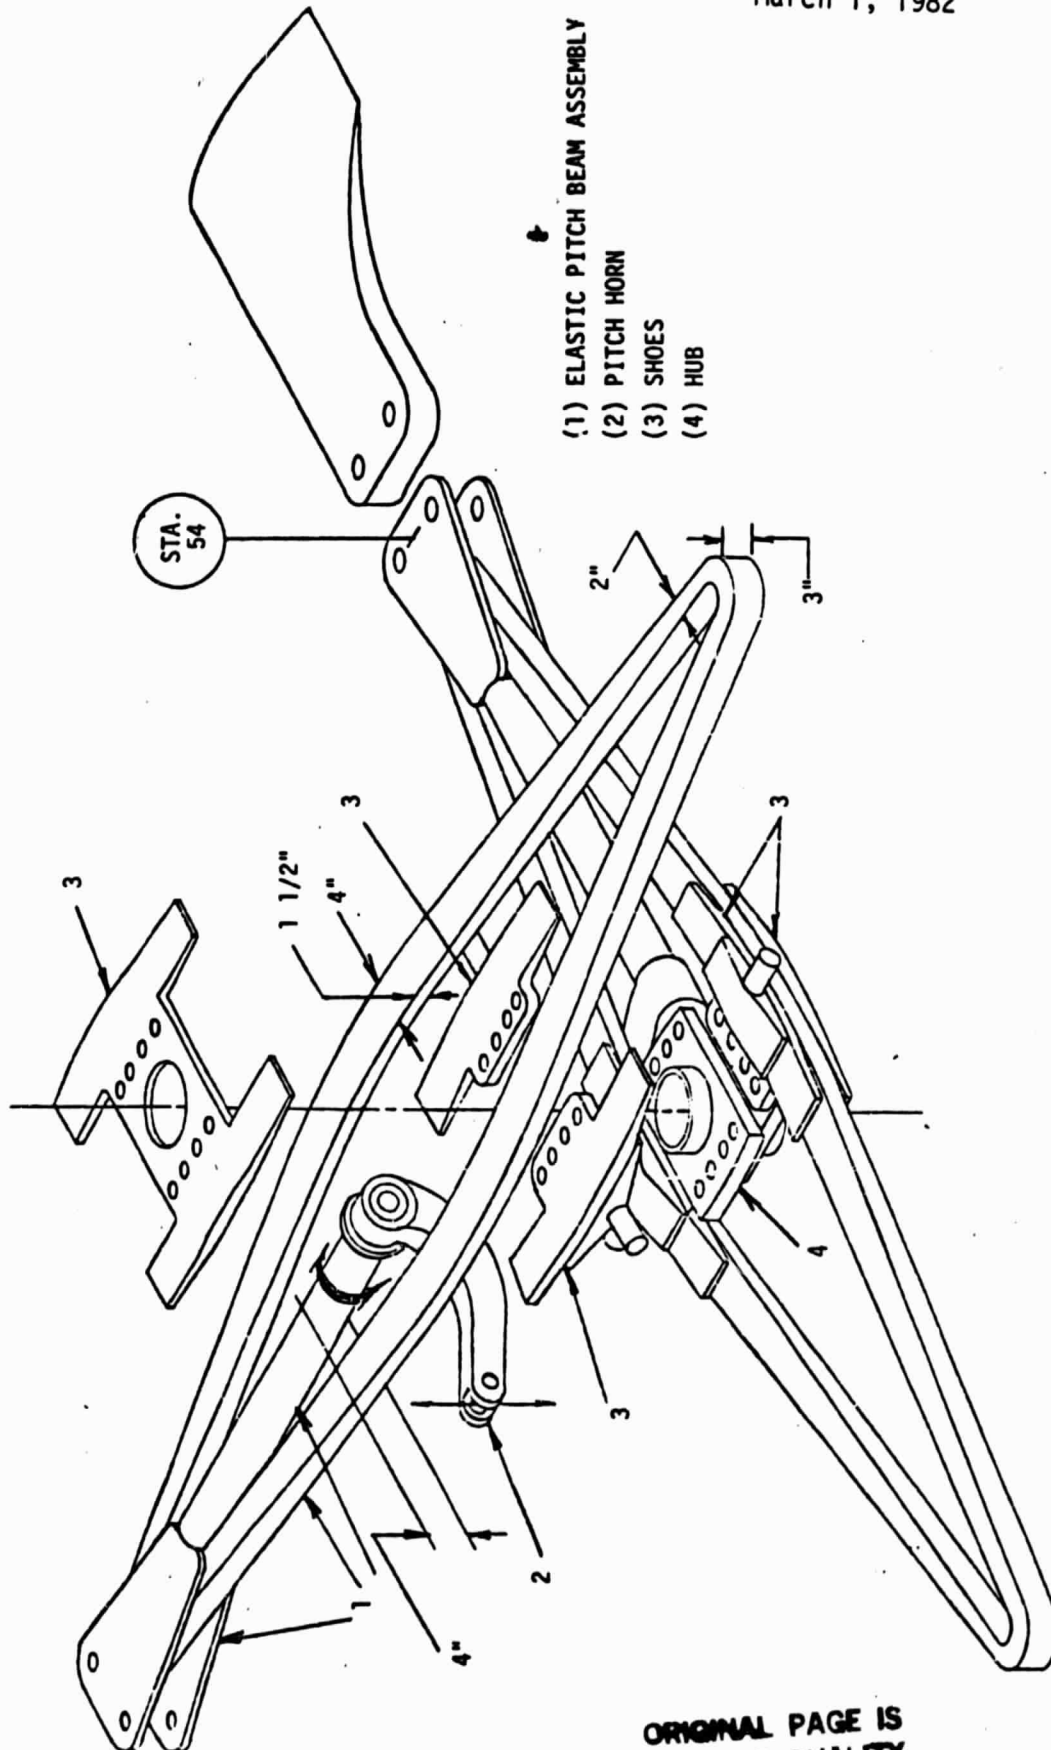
Elastic Pitch Beam Rotor Head - Exploded View
